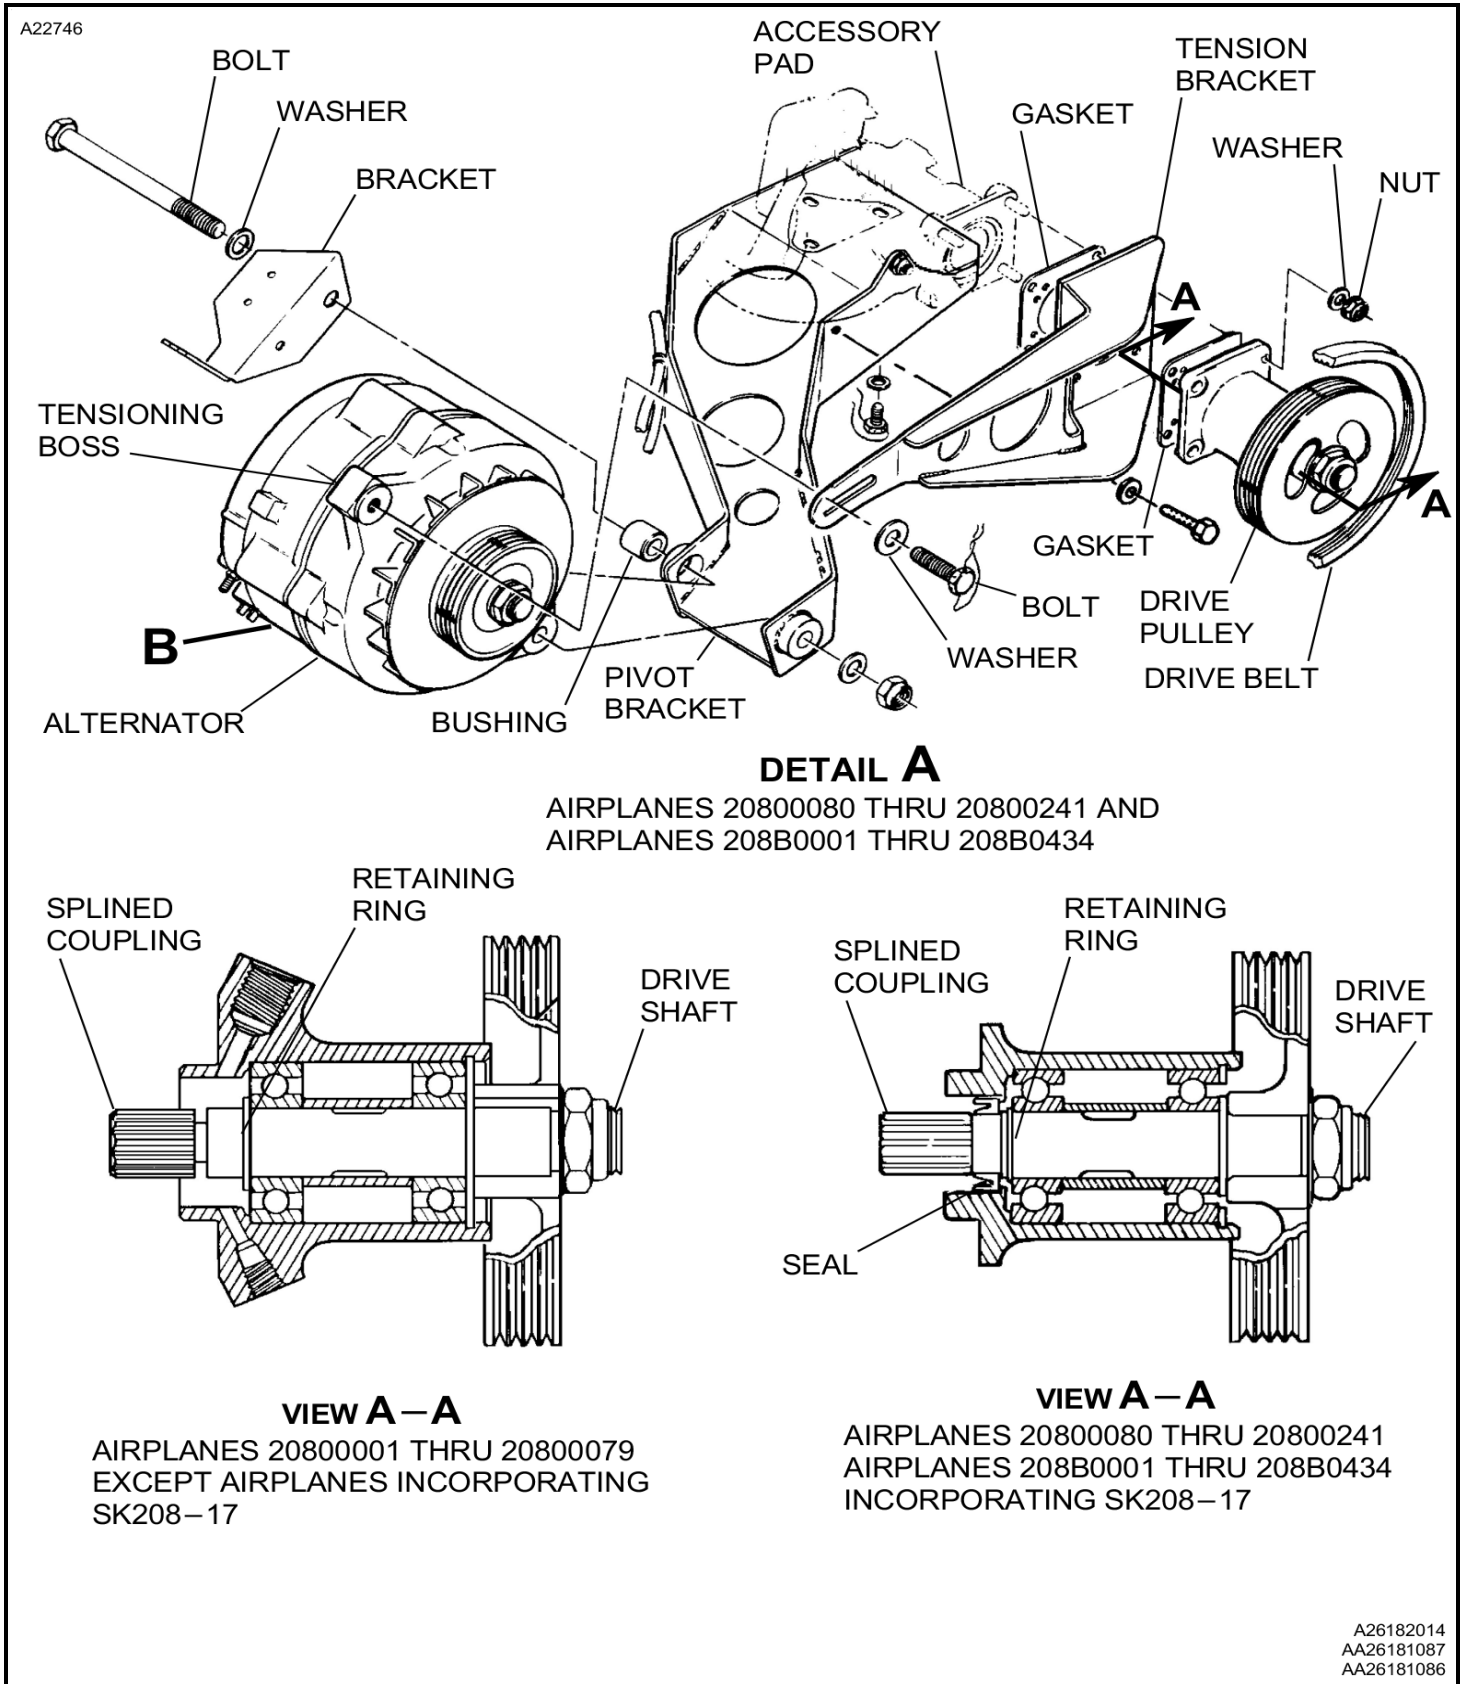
Sheet 3 : Alternator and Drive Pulley Installation
